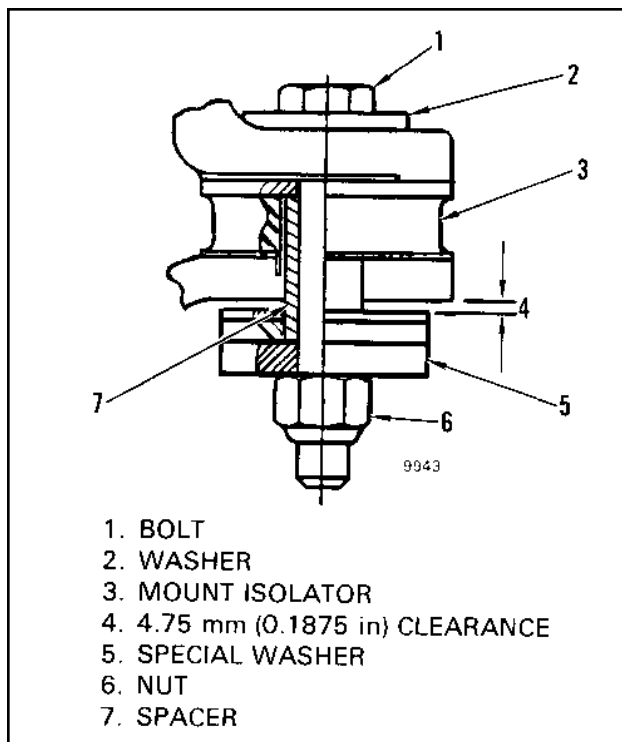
MOTOR MOUNT ARRANGEMENT
